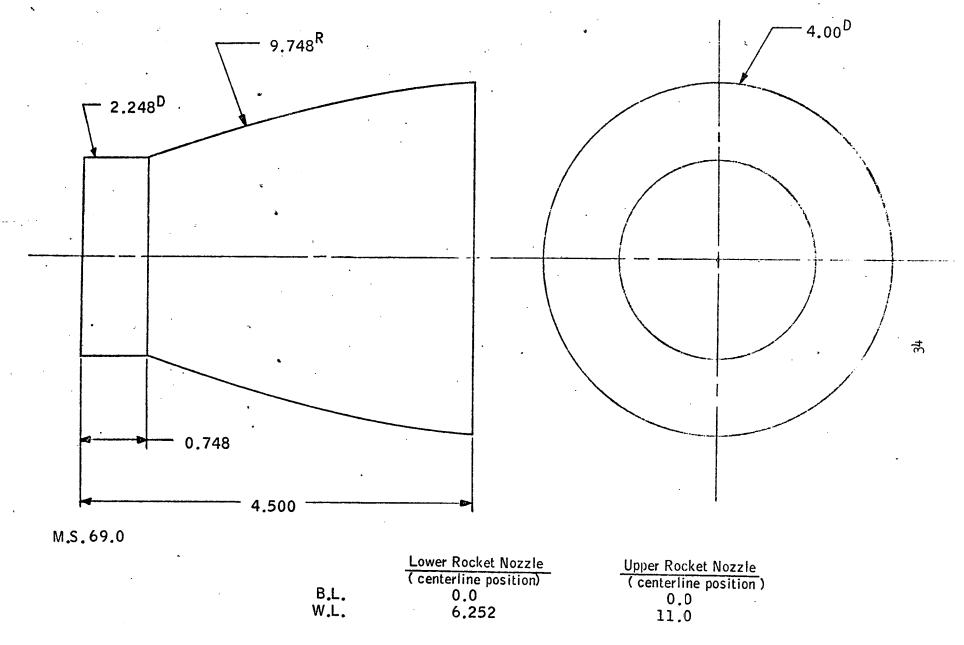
Model Rocket Engine Nozzle R_1 (all dimensions in inches)
